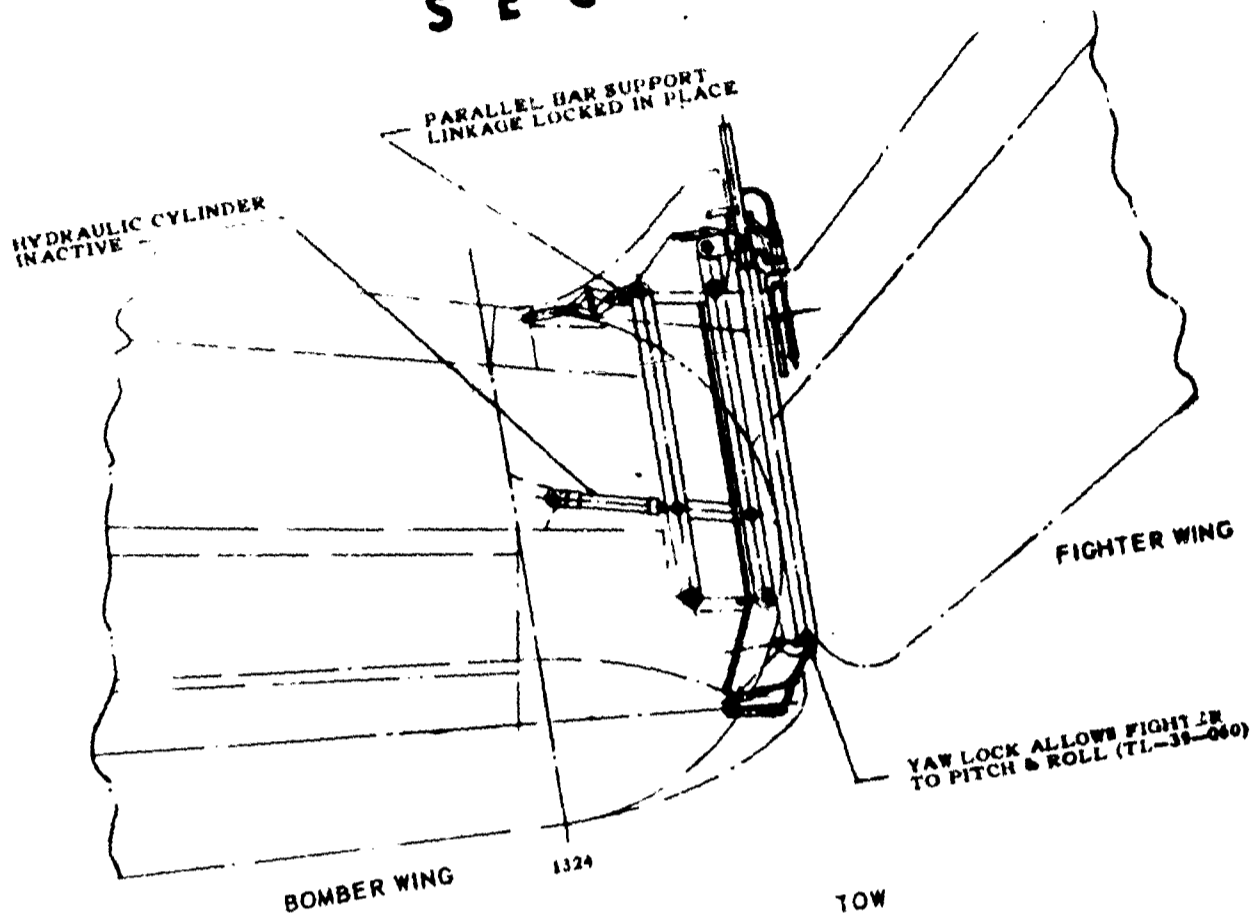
BALL AND SOCKET JOINT COUPLING - COUPLING AND JAW CONDITION
